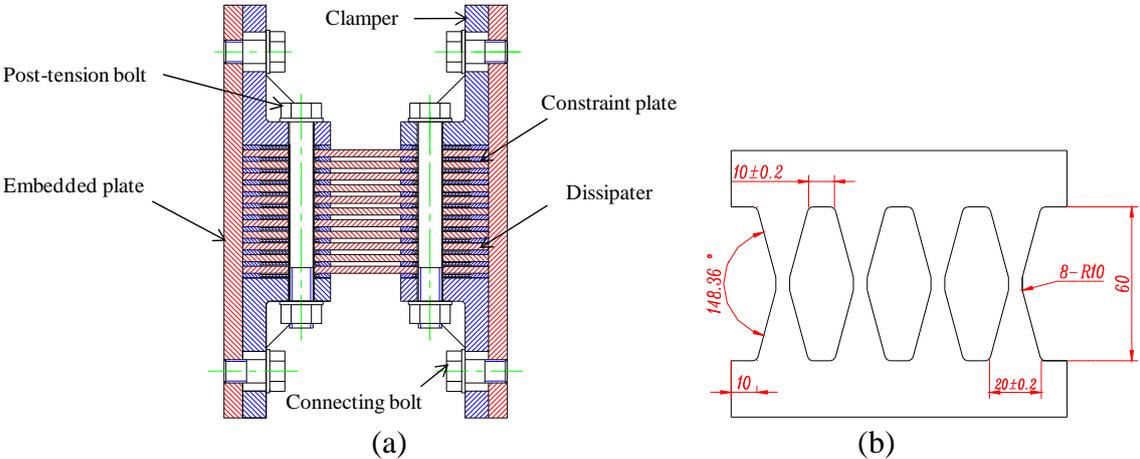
Metallic damper: (a) Assembling modular damper; (b) Configuration of dissipater
